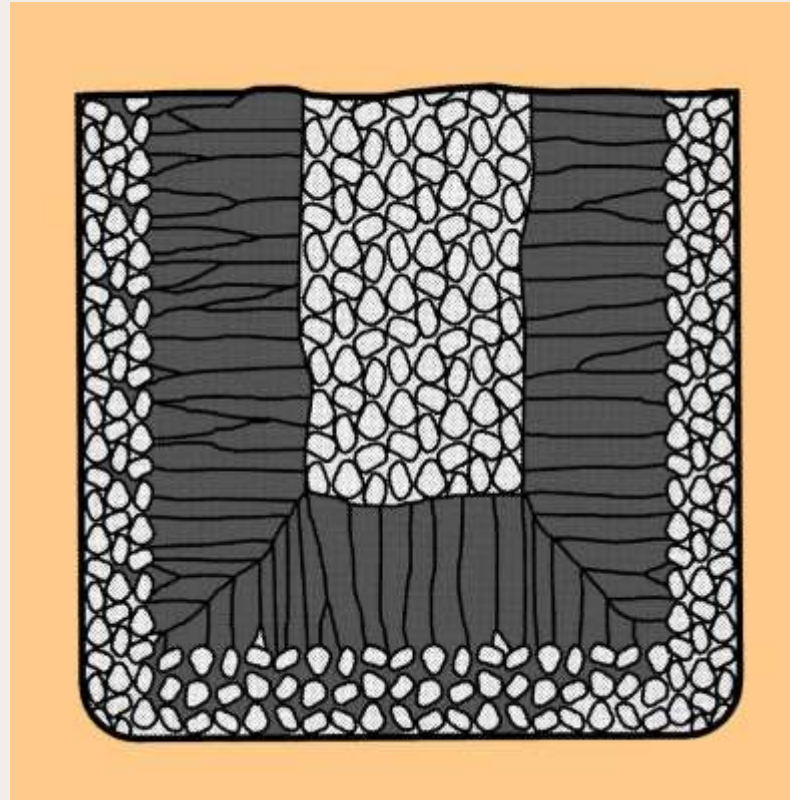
Characteristic grain structure in an alloy casting, showing segregation of alloying components in center of casting.
